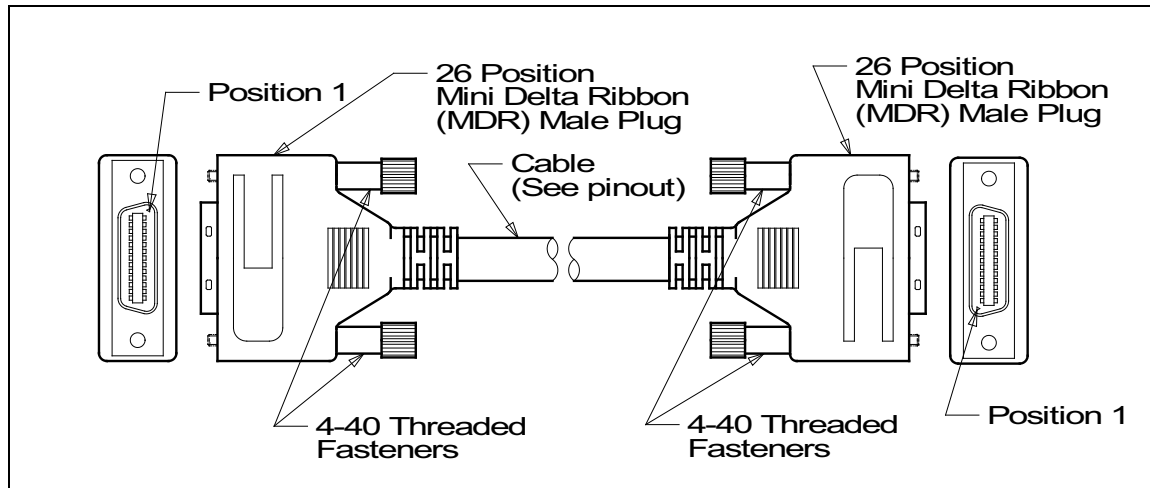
Mini Camera Link (MiniCL) Cable Assembly
